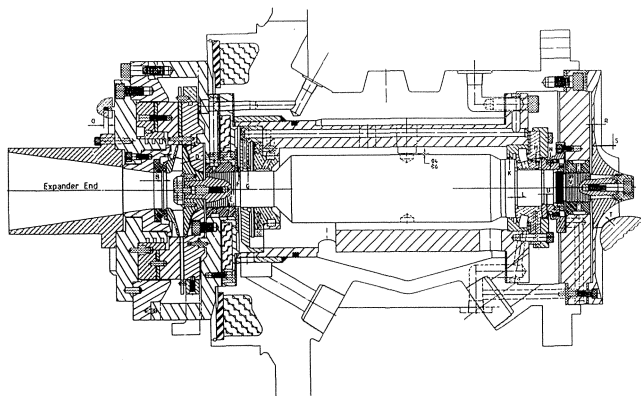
Cross Section of Original HP Expander Rotor and Casing.
